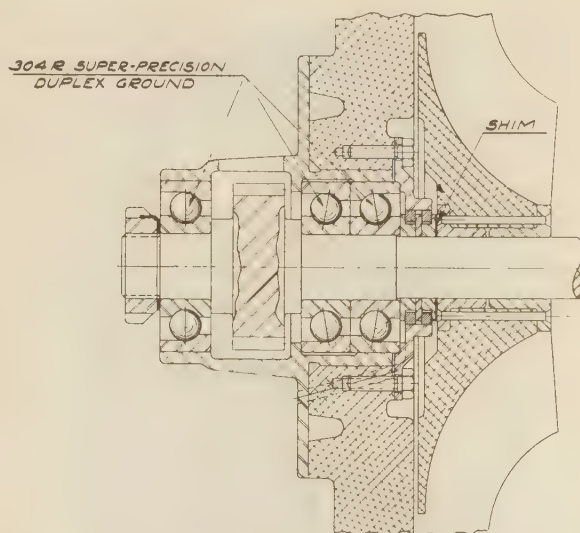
TYPICAL SUPERCHARGER-BEARING LAYOUT
